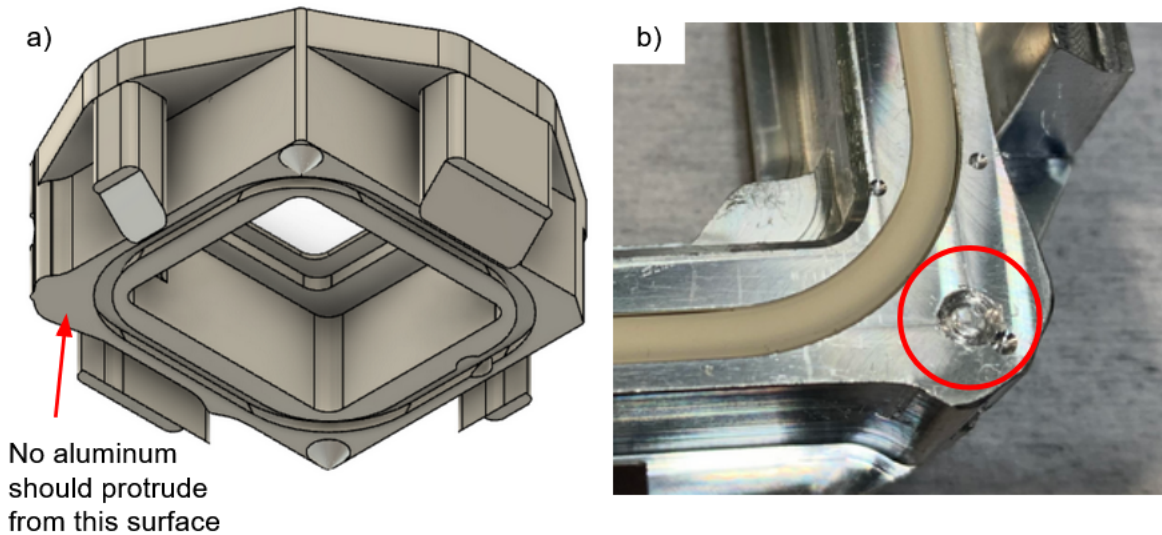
a) If aluminum protrudes from the surface indicated, this may prevent the base from fully touching the O-ring in the cover, preventing a seal. b) Harmless scratches were visible after a total of more than 20 separations.
